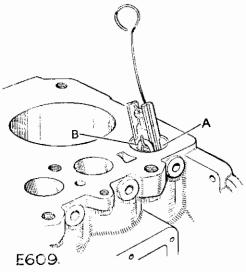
Removing tappet and roller A—Tappet guide. B—Roller
